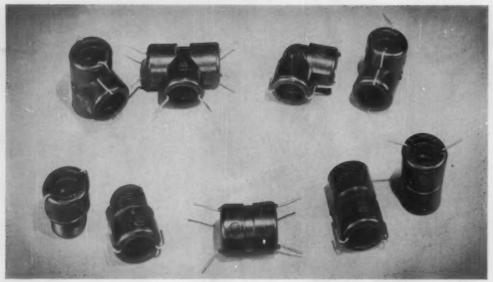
Assortment of resistor fittings for polyethylene tubing, including tees, elbows, couplings, and threaded fittings to permit joining of polyethylene and metal tubing and pipe. Molded-in ribbon resistors can be seen lying flush with inside surfaces of fittings
